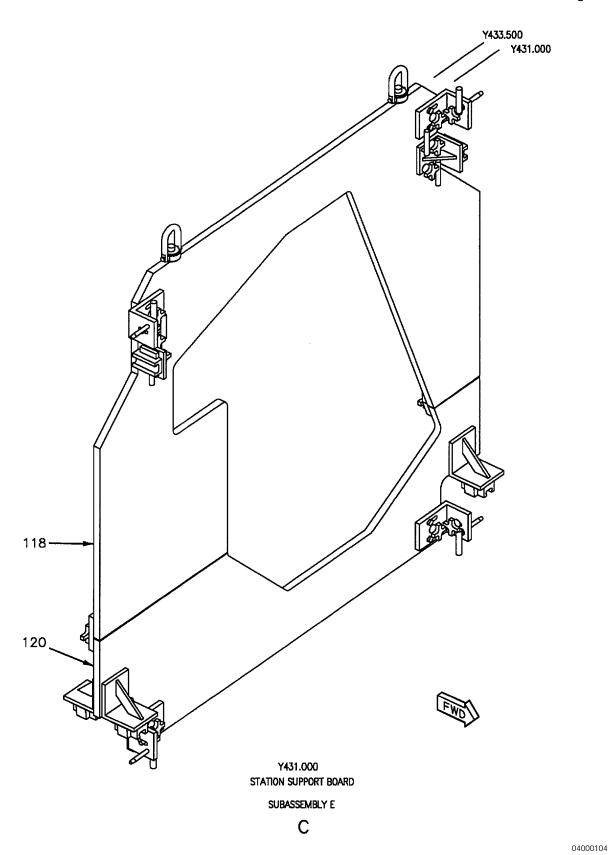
Engine Air Inlet Maintenance Fixture; RE174322020-2 RH (Sheet 4)
